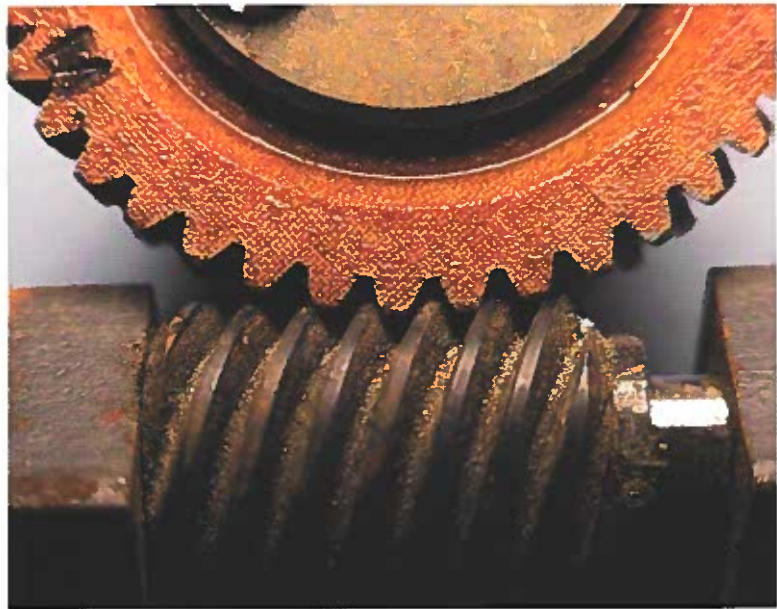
In a worm and worm wheel, the worm (bottom) has only one tooth. It spirals like a screw thread.
